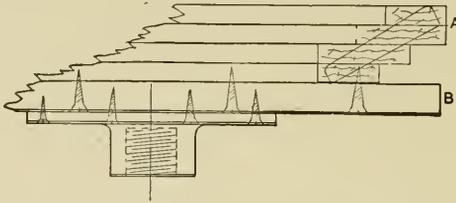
Segments for Bevel Gear Pattern on Face Plate
